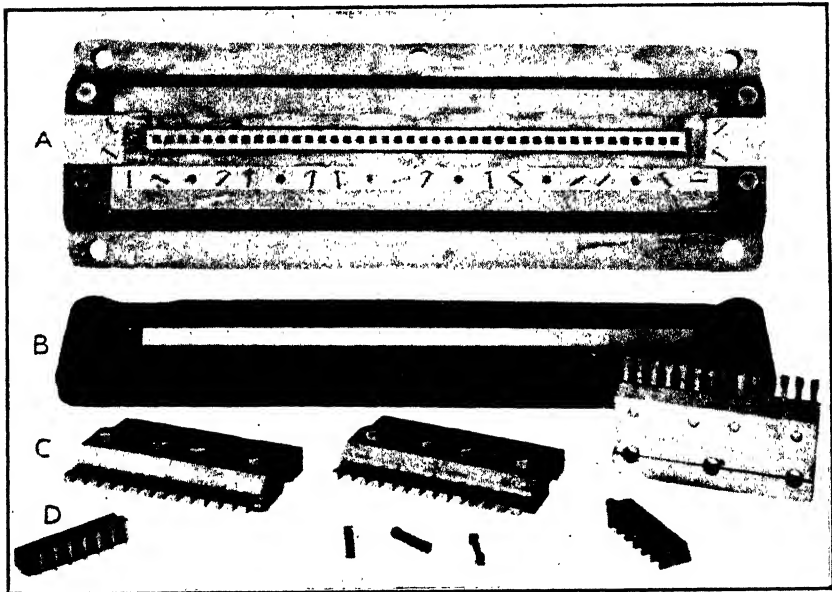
Perforating die, holder (A) with guide pins and with interchangeable die sections (D) wedge-clamped into place, cam-actuated stripper (B) riding on guide pins and fitting punches closely, and clamp type sectional punch holders (C).
